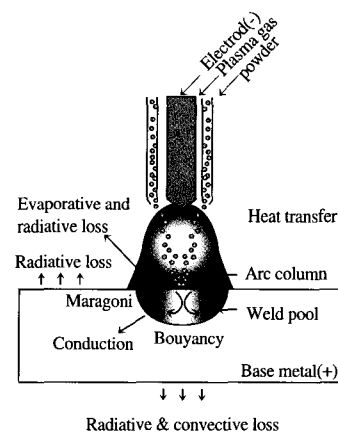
Schematic illustration of the plasma transferred arc welding system showing the front view of the arc and weld pool with filler.
